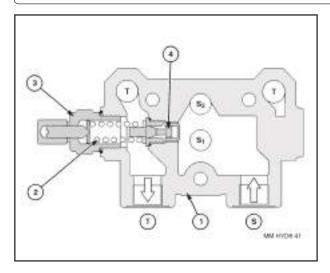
SYSTEM RELIEF VALVE CLOSED
